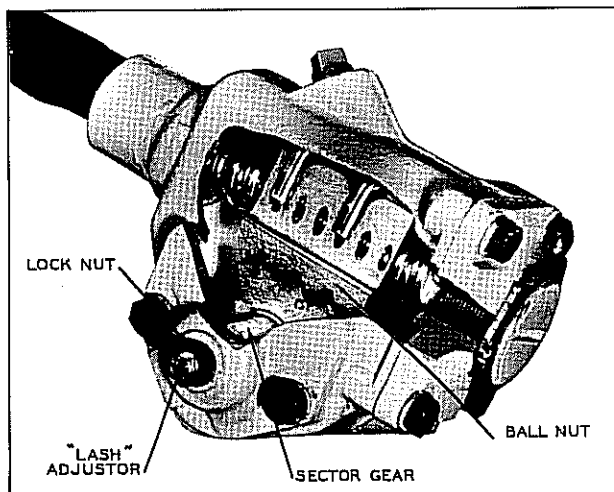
Steering Gear Lash Adjustment (Sector Gear)
